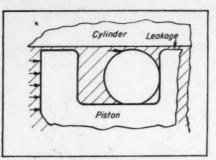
When O-ring seal is not precompressed, fluid flows through pistoncylinder clearance, effecting no seal
